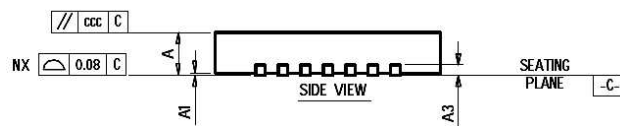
Package Dimensions of 10-lead Plastic DFN (3mmX3mm)
